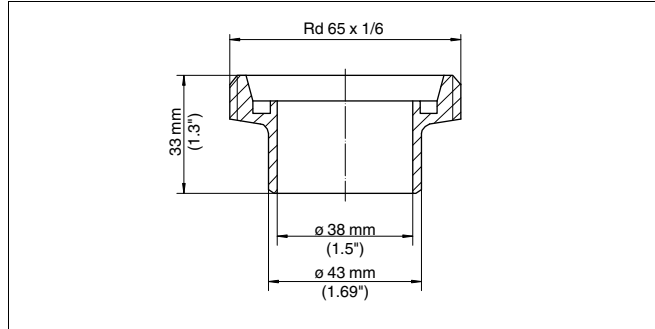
Dimensions welded socket, bolting DN 40 according to DIN 11851
